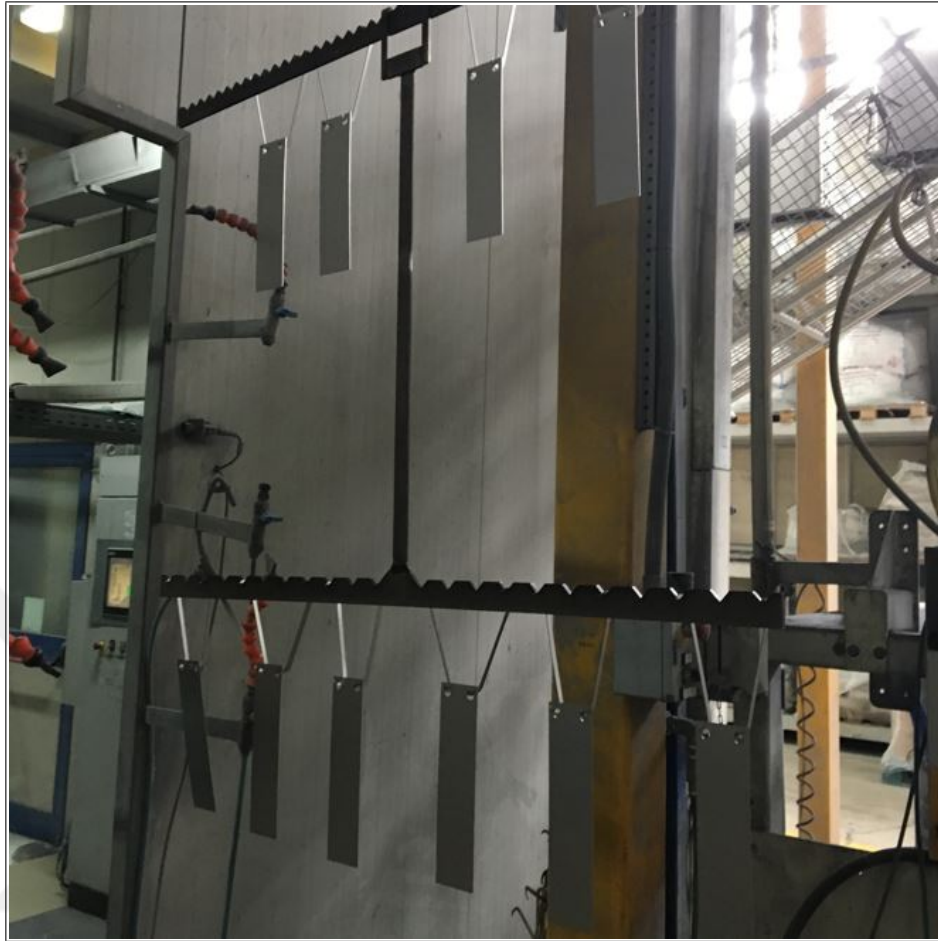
Uncoated sheet metal sample on conveyor line.
